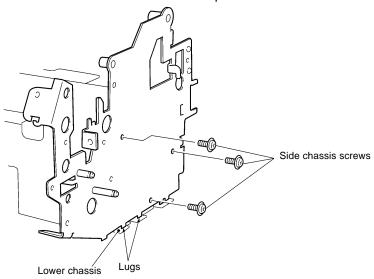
Installing the Left and Right Sides of the Chassis
